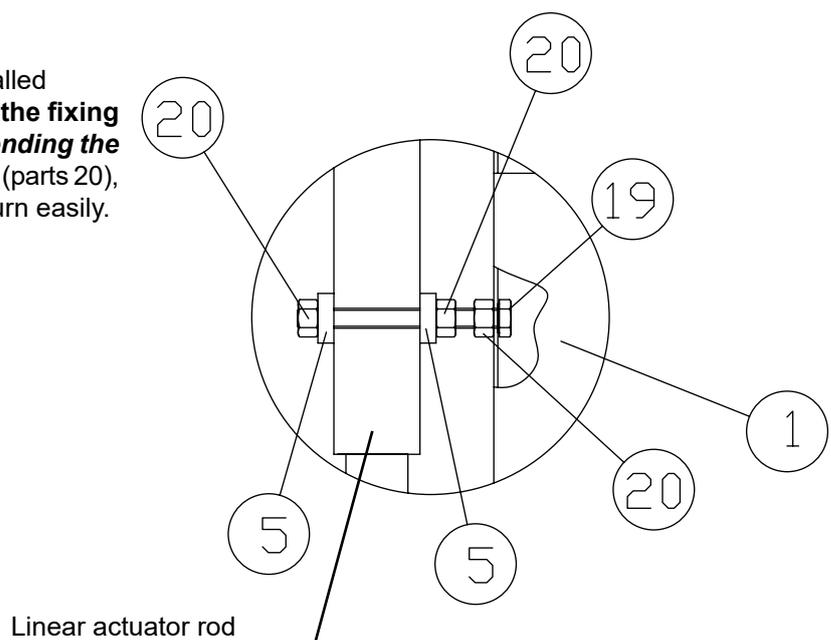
Supporting the linear actuator rod. (Fig. 1, detail DET1)
